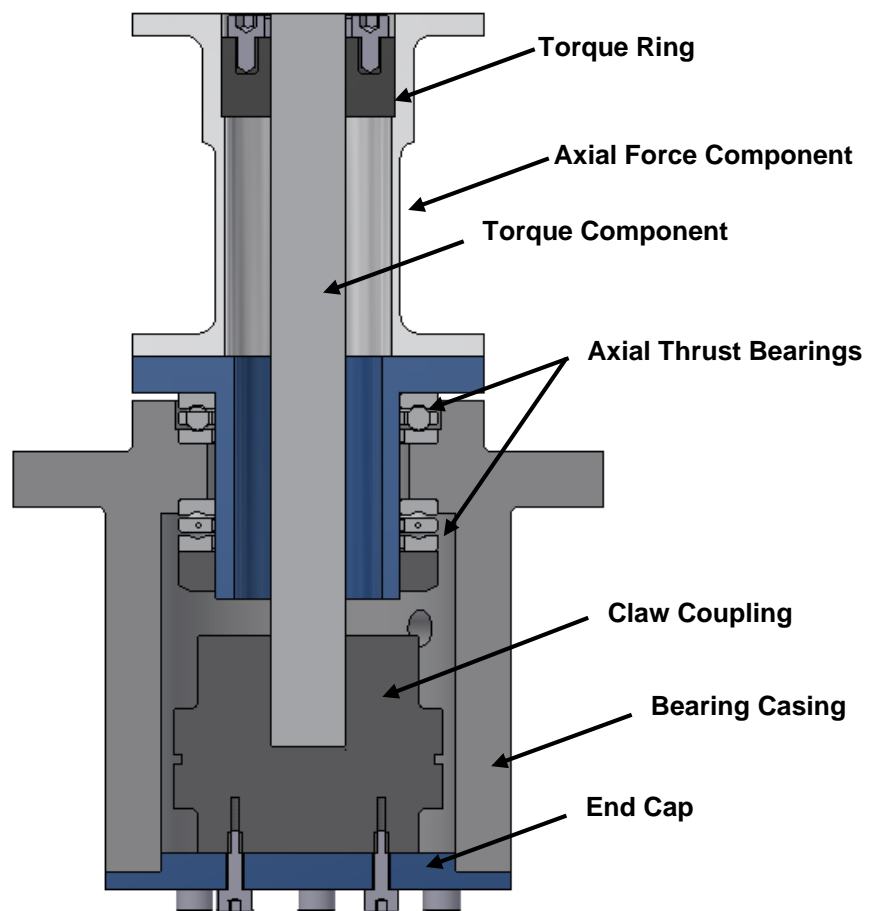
Sectioned View of FTSW Platform Load Cell
